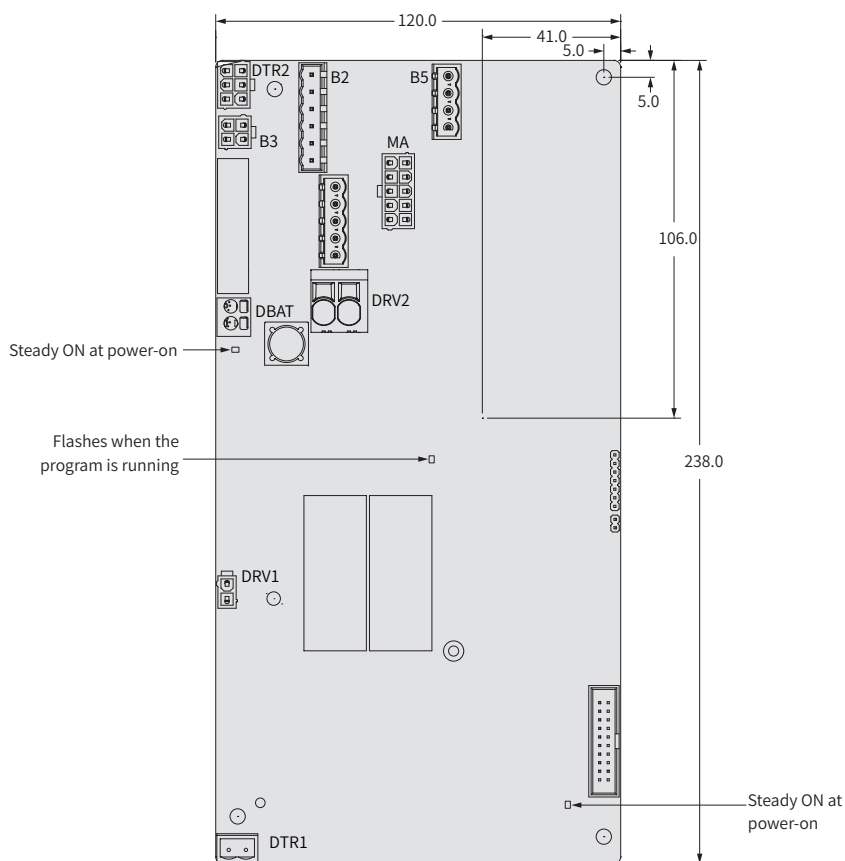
Outline and dimensions of the MCTC-PCB-N1 (unit: mm)
